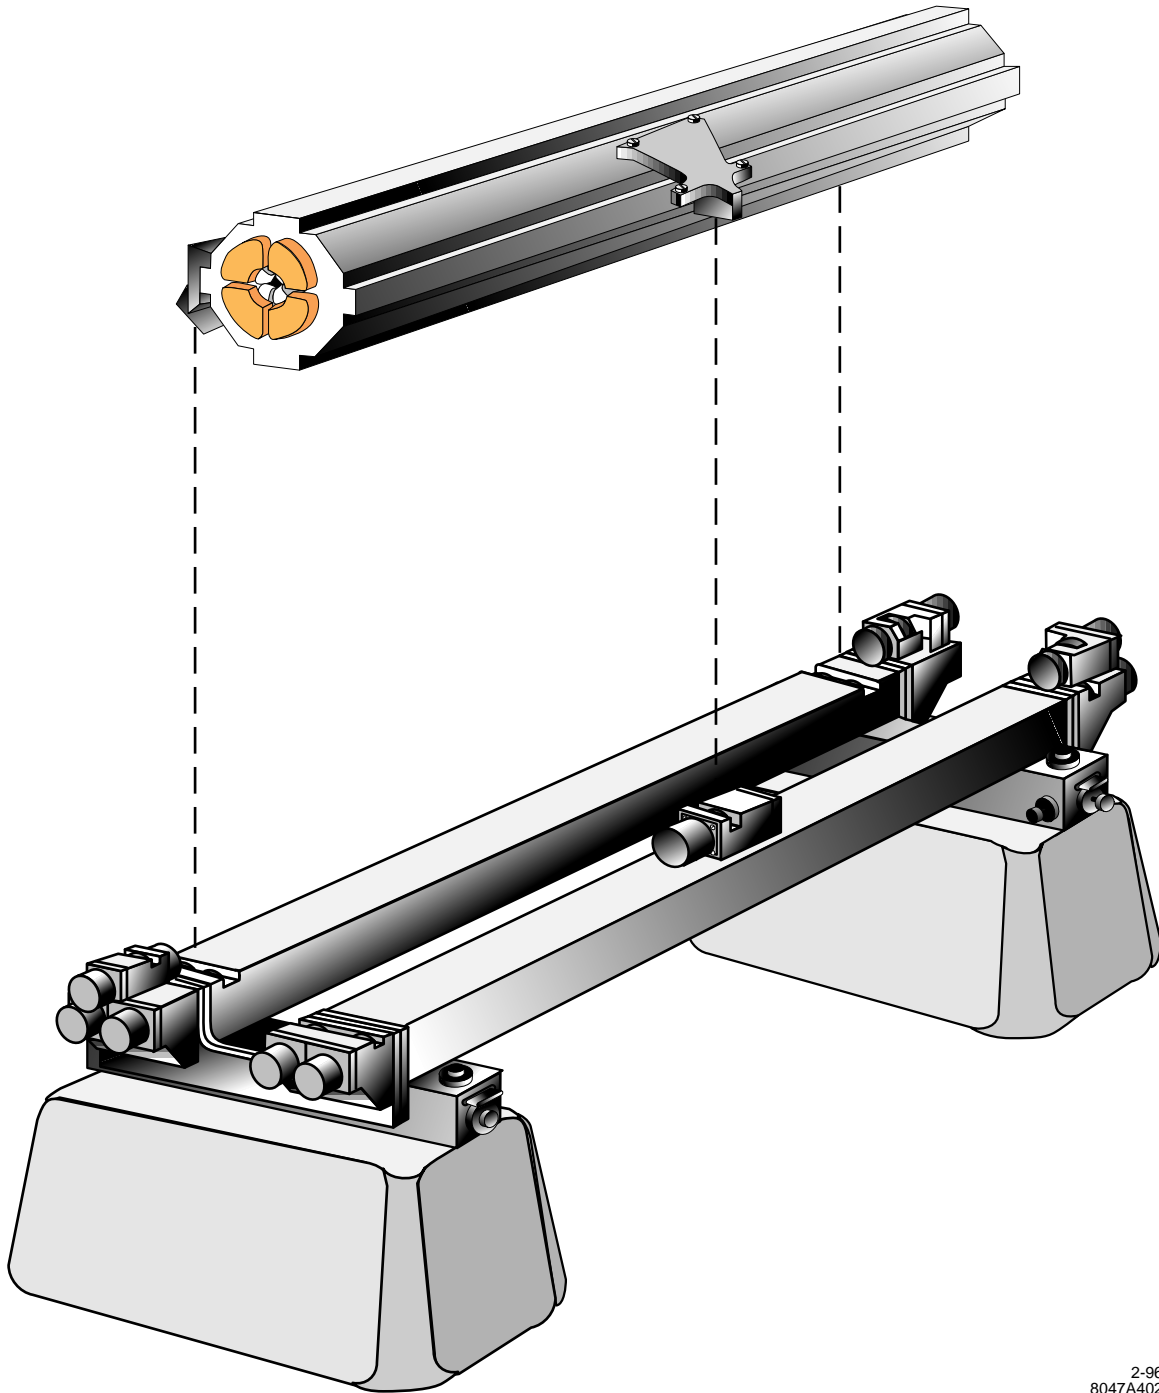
Floor-mounted accelerator remote positioning support assembly.
